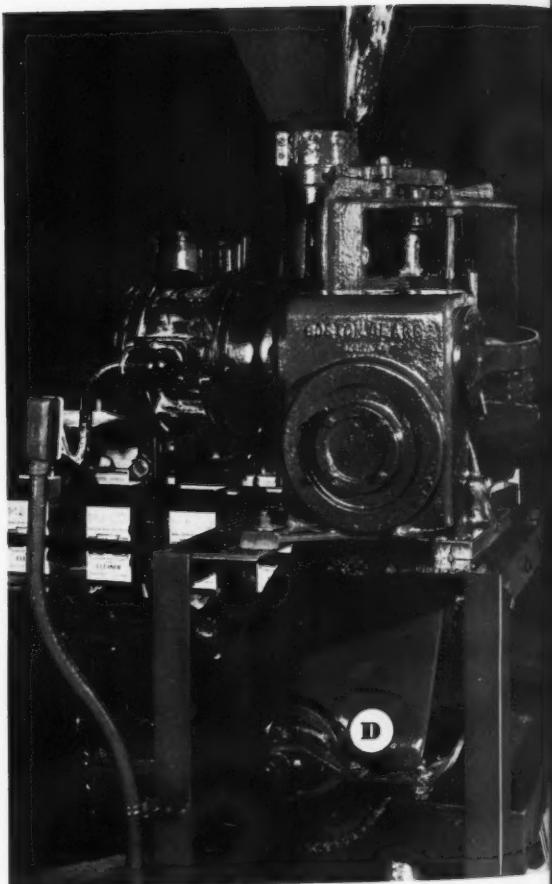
Built-in electrically operated brake is feature of this gearmotor which drives a tumbling barrel
